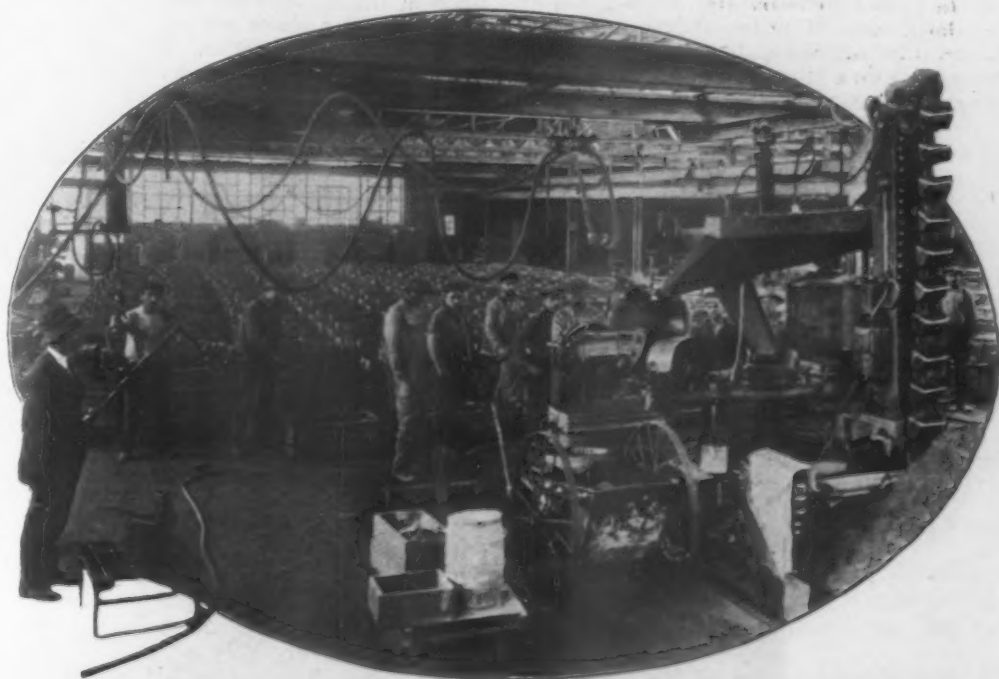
General View of Beardsley-Piper Sand Slinger Molding Machine on Model 4 Overland Cylinders
